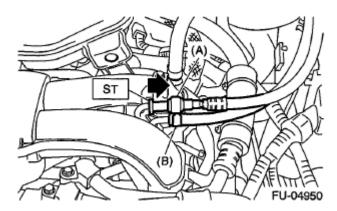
Attaching ST To Fuel Delivery Pipe Courtesy of SUBARU OF AMERICA, INC.
